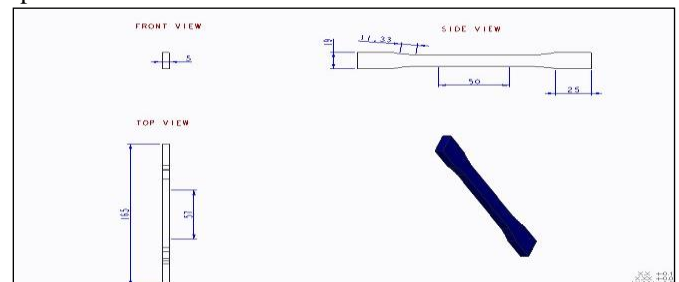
ASTM D638 standard and 3D model of tensile test specimen.
